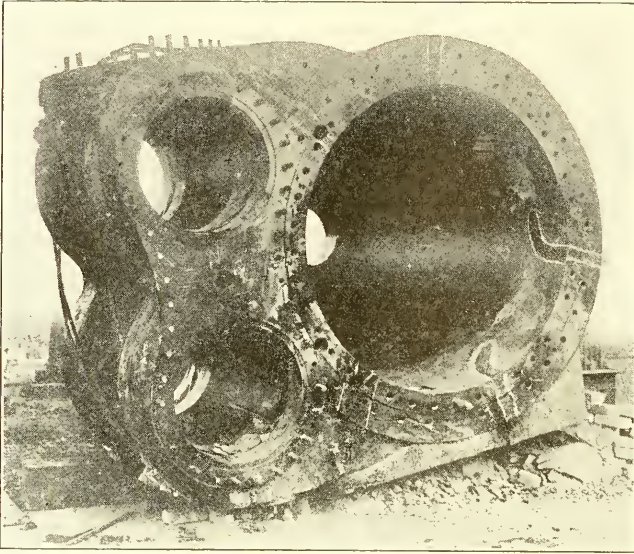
Welding of Low-Pressure Cylinder Completed.
